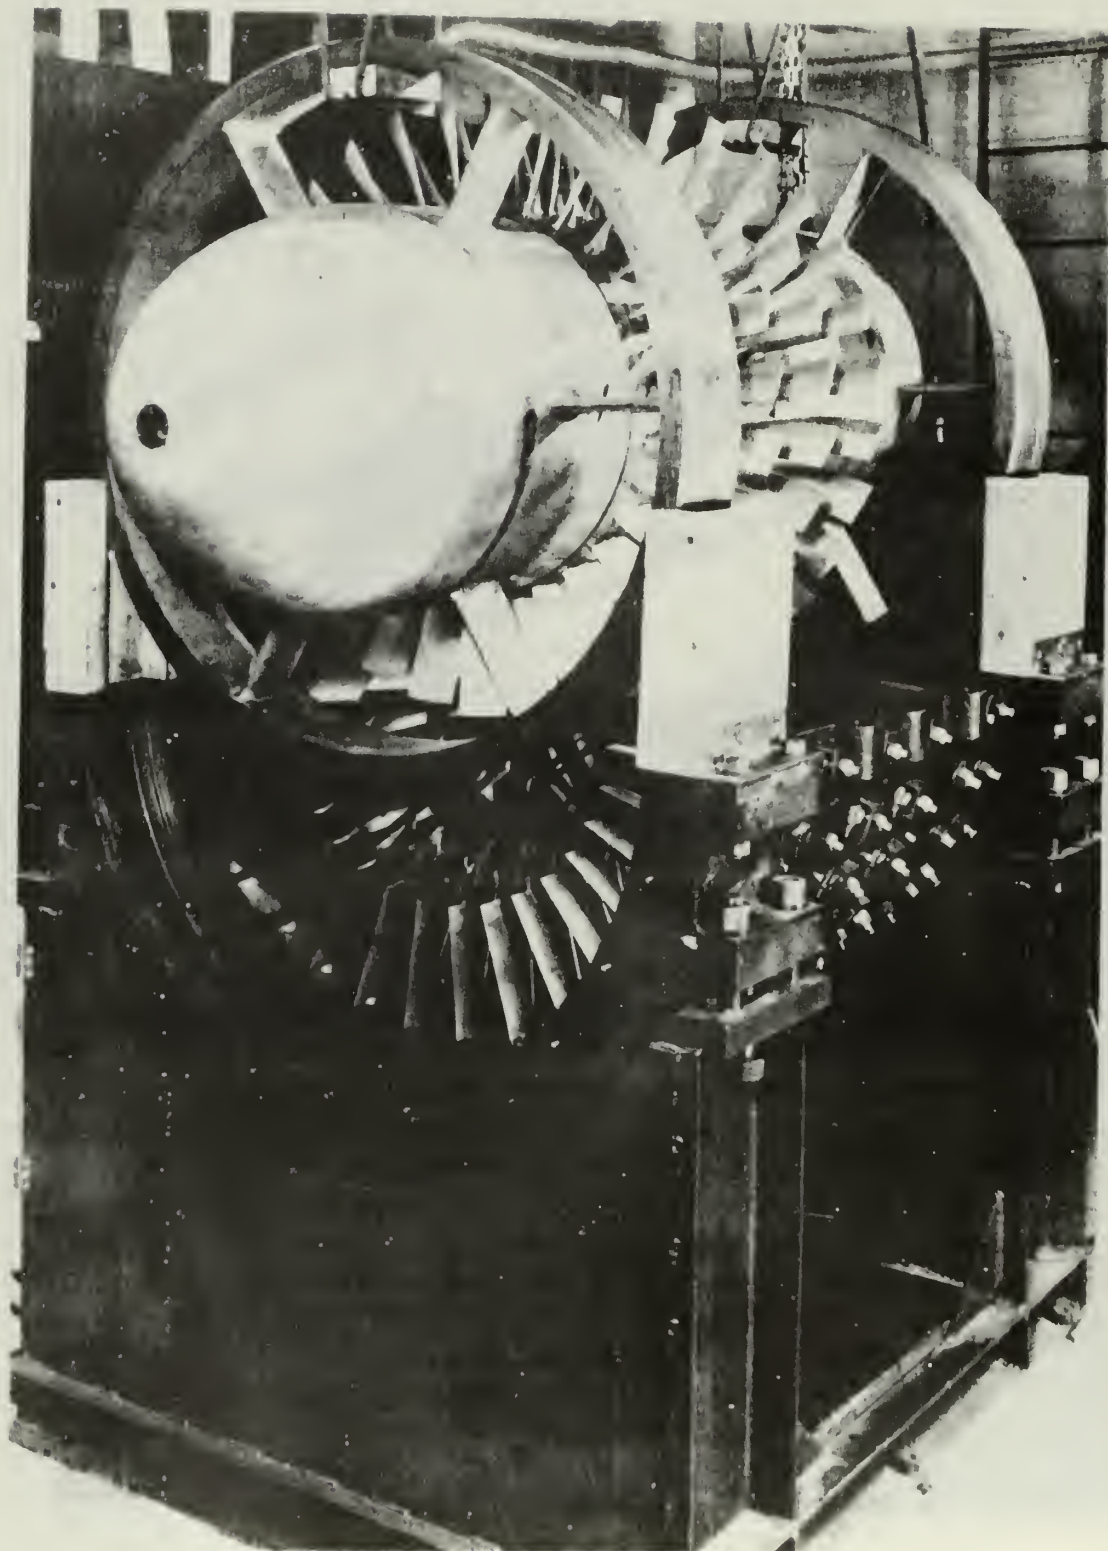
ASSEMBLY OF ROTOR IN LOWER CASING
